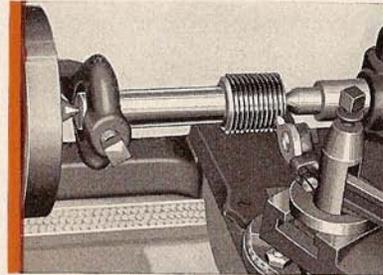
Cutting a Screw Thread on a Gauge in the 9-inch "Workshop" Lathe.
